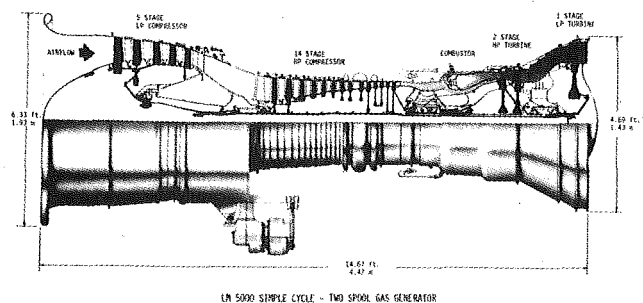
Cross section of GE LM5000 gas generator giving overall dimensions
